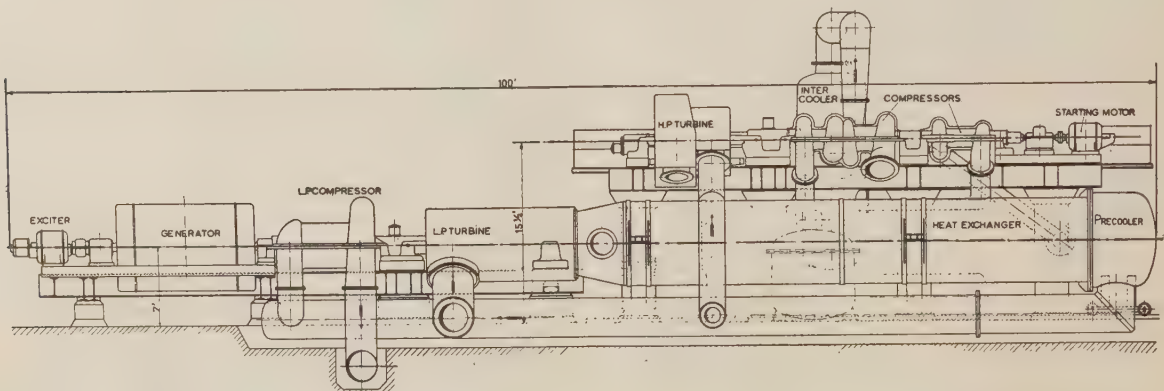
MACHINE SET OF 25,000-Kw AK-PLANT 850 TO 85 PSI
